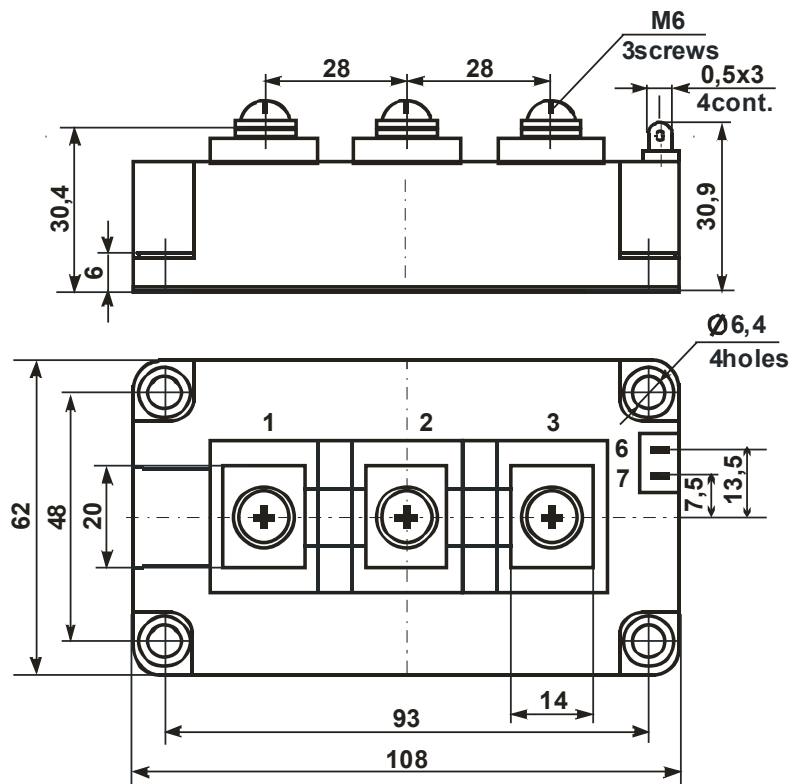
Overall dimensions of modules M10 (housing “E3-1”)
